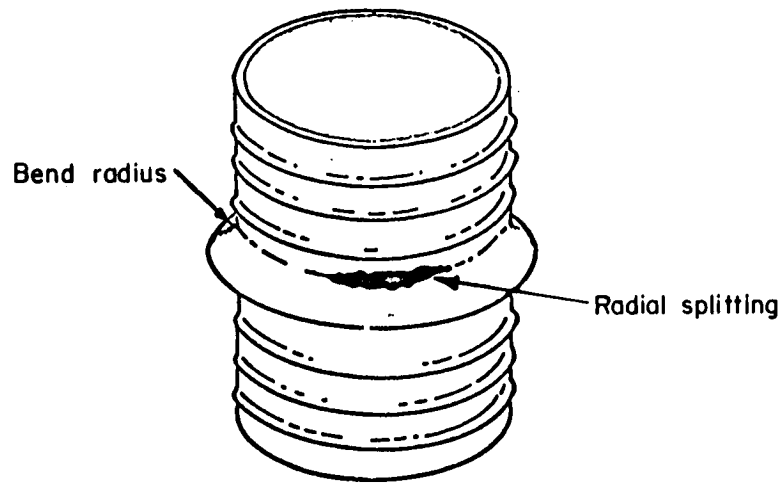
EXAMPLE OF FAILURE IN TUBE BULGING (REF. 52)
